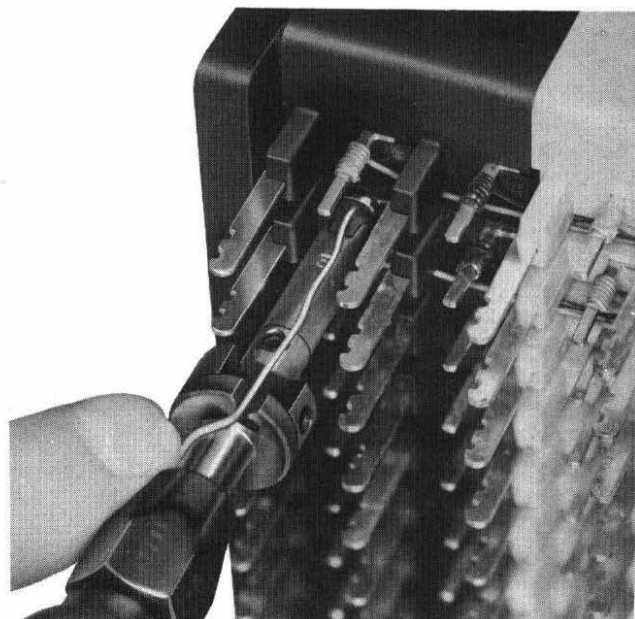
Wire wrapping external cable on Jacks Test No. 37
